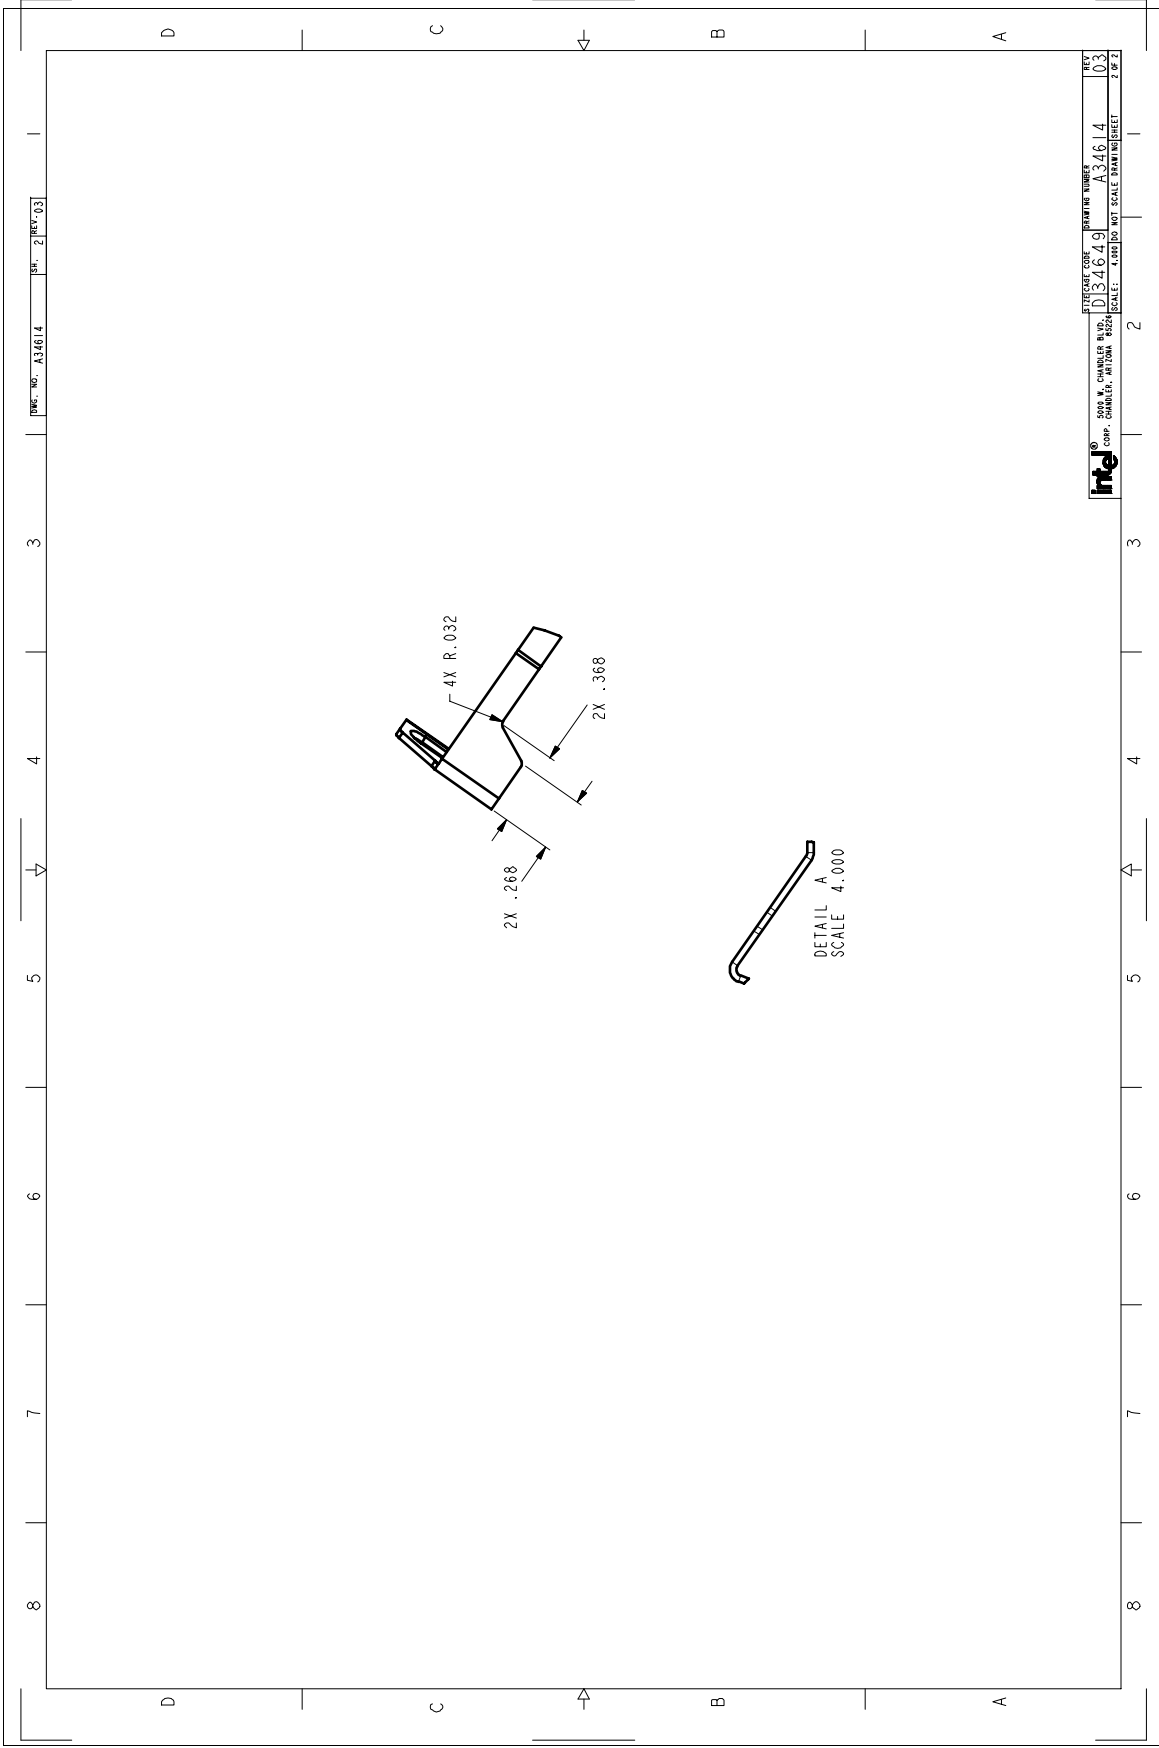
Enabled Heatsink Clip for FC-mPGA2P Package (Sheet 1 of 1)
